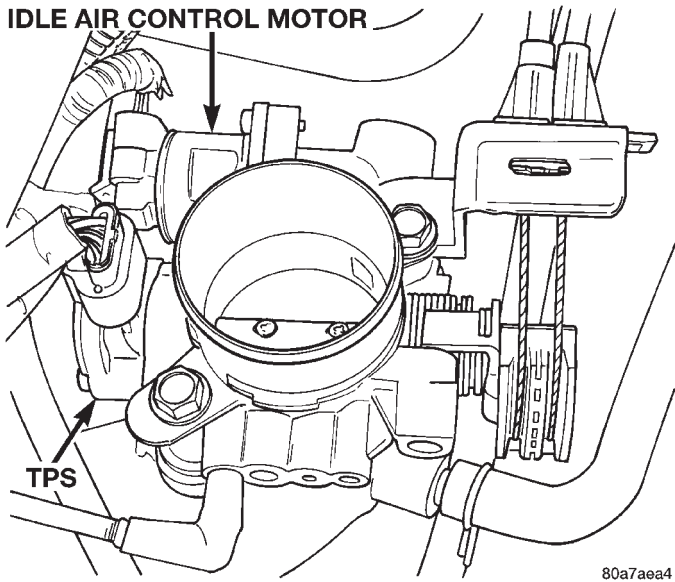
Idle Air Control Motor Air Bypass Passage—2.4L
